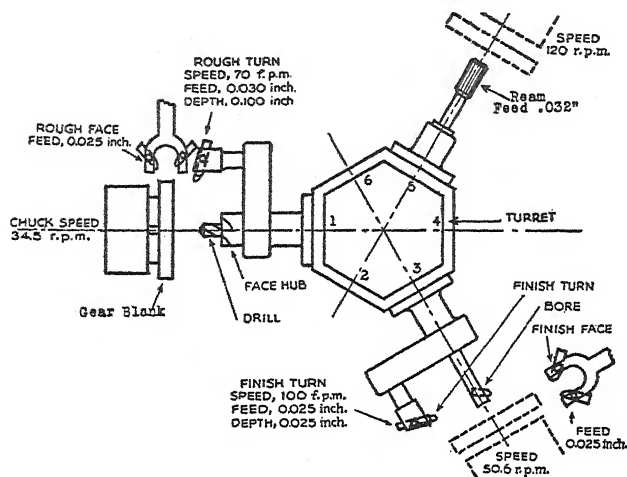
The Illustrative Setup for Machining the Cast-Iron Gear Blank Shown in the Previous Figure on the Turret Lathe.
